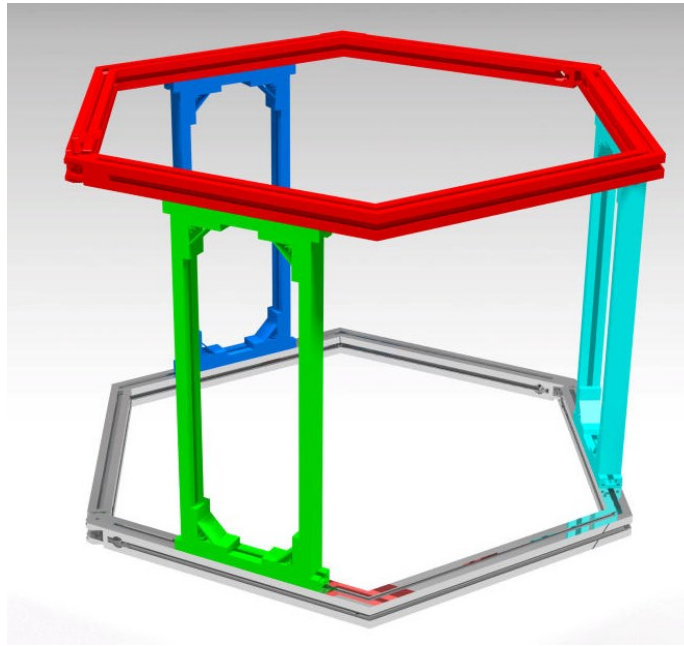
FINAL CHASSIS DESIGN- RENDERED CAD IMAGE
